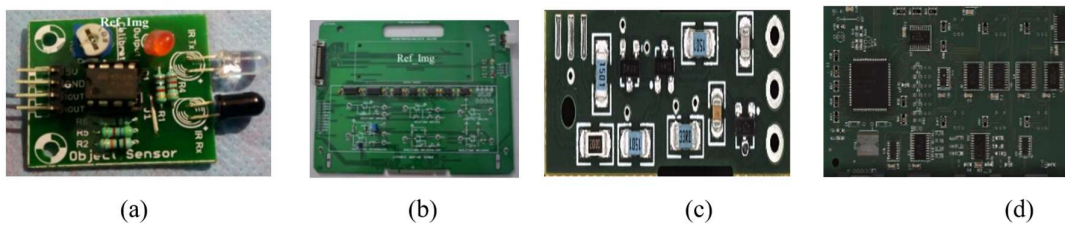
Assembled PCB Samples-(a)Sample1 PCB with only TH components , (b) Sample 2 PCB with only TH components, (c) Sample3 PCB with only SMT components, (d)Sample5 PCB with only SMT components
